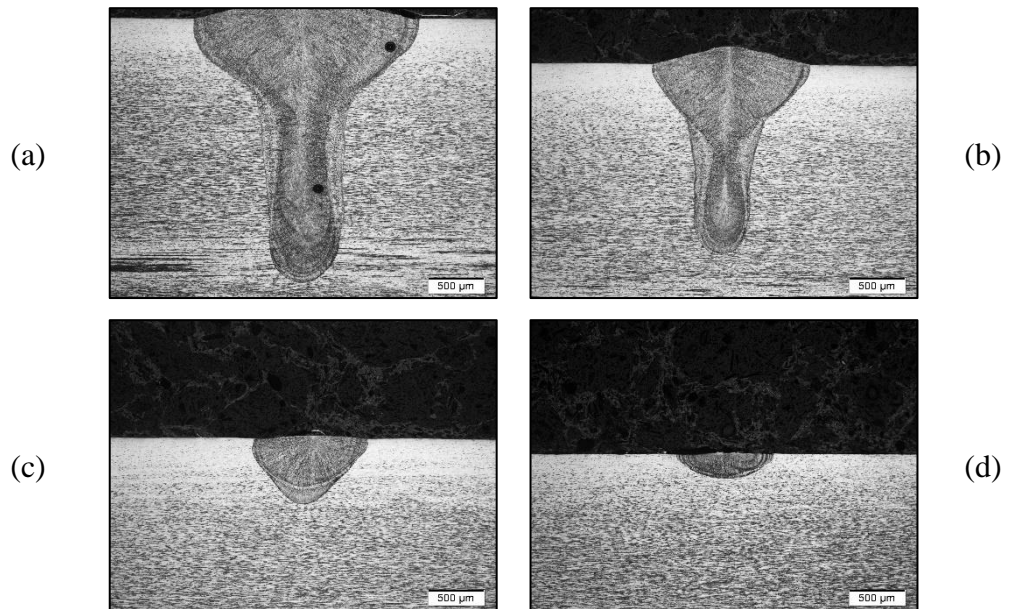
304L laser weld macrosections at 800 W and travel speeds of 5 mm/s (a), 10 mm/s (b), 25 mm/s (c), and 50 mm/s (d).
